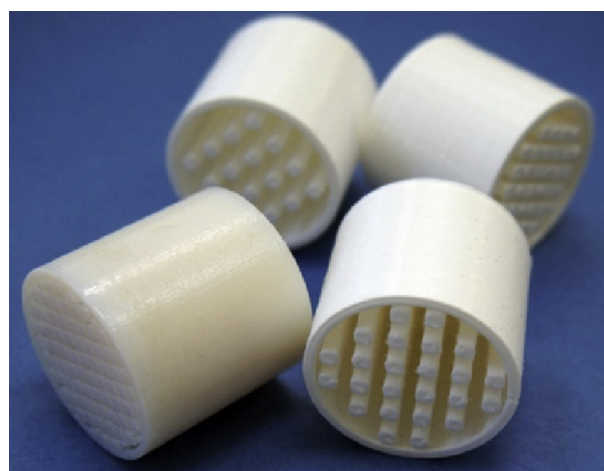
Examples of honeycomb type 3D-printed molds.
